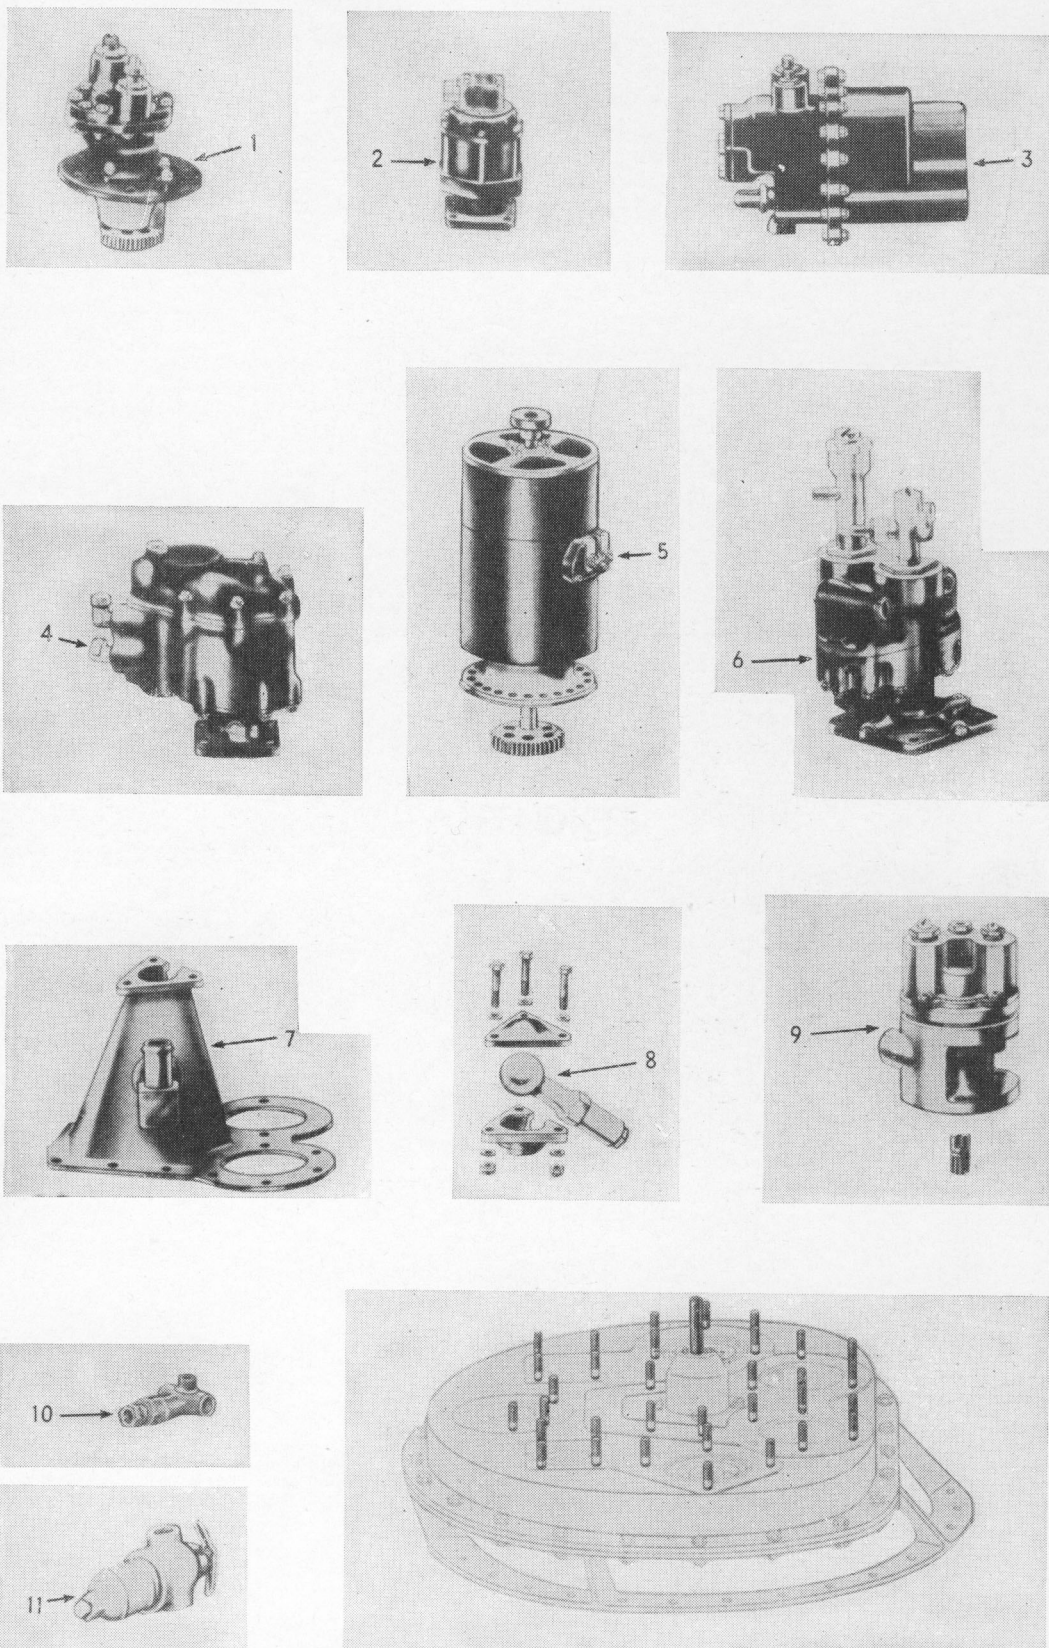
The GE I-16 accessory components include (1) starting fuel pump; (2) tachometer generator; (3) barometric valve; (4) governor; (5) starter; (6) main fuel pump; (7) support housing; (8) ball support; (9) lube and scavenger pump; (10) lube relief valve; (11) lube-oil filter.
